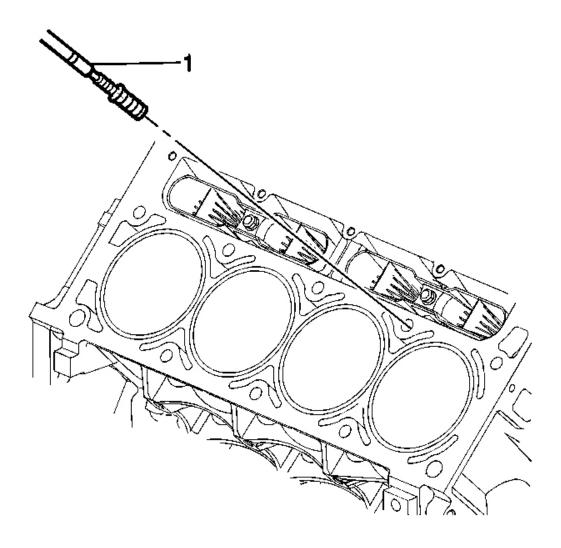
Installing Insert & Driver Into Cylinder Bolt Hole Courtesy of GENERAL MOTORS CORP.
